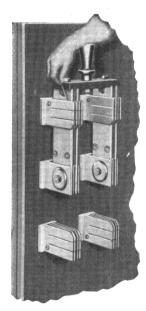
A One and One Half Thousandth Feeler Gauge is Used to Check the Contact Between Blades and Jaw.
